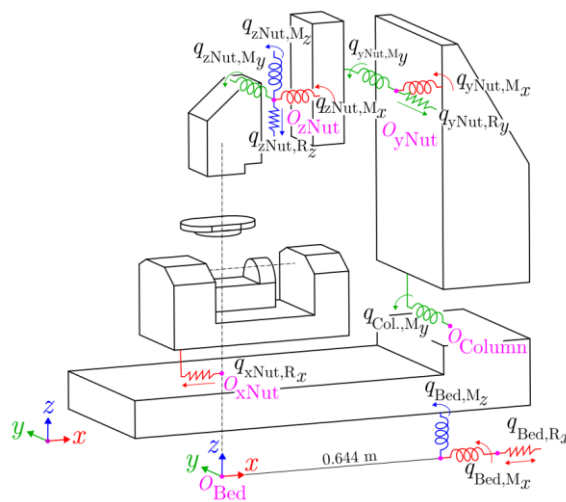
Multibody model with flexible joints of a 5-axis machine [115].
